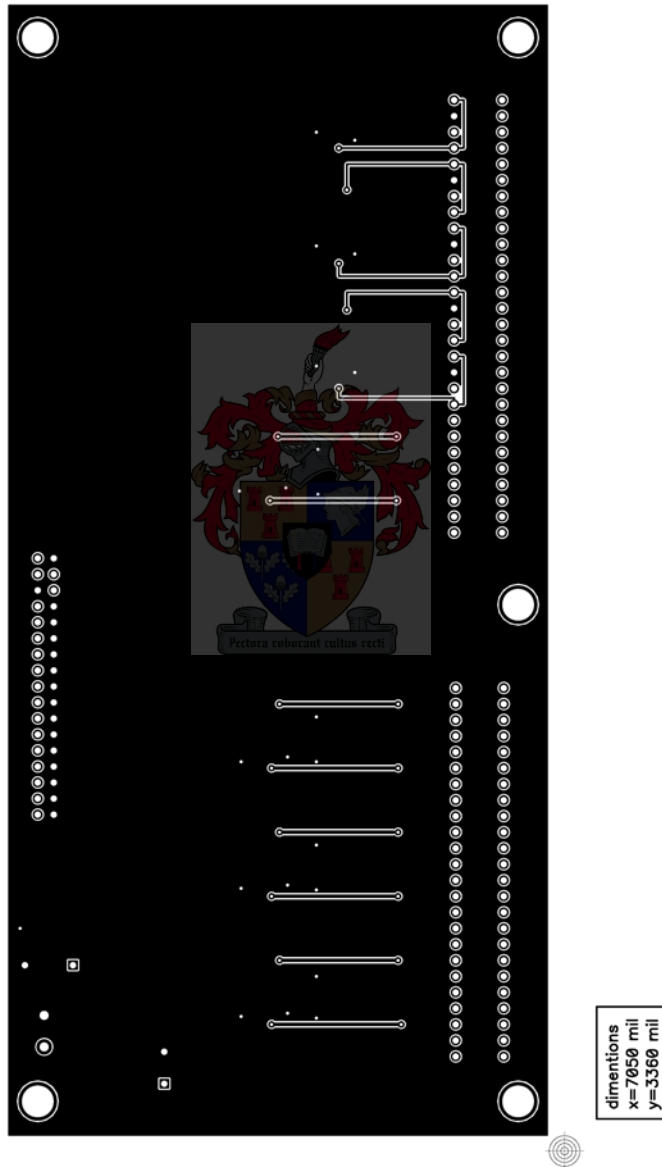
PCB layout of Optical Driver Board BOTTOM layer
